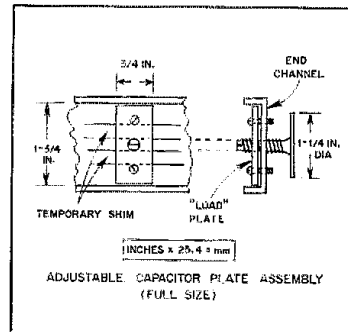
This drawing shows the assembly of the adjustable capacitor plate. The "loading" plate is provided to eliminate sloppiness in the capacitor plate adjusting the screw.
